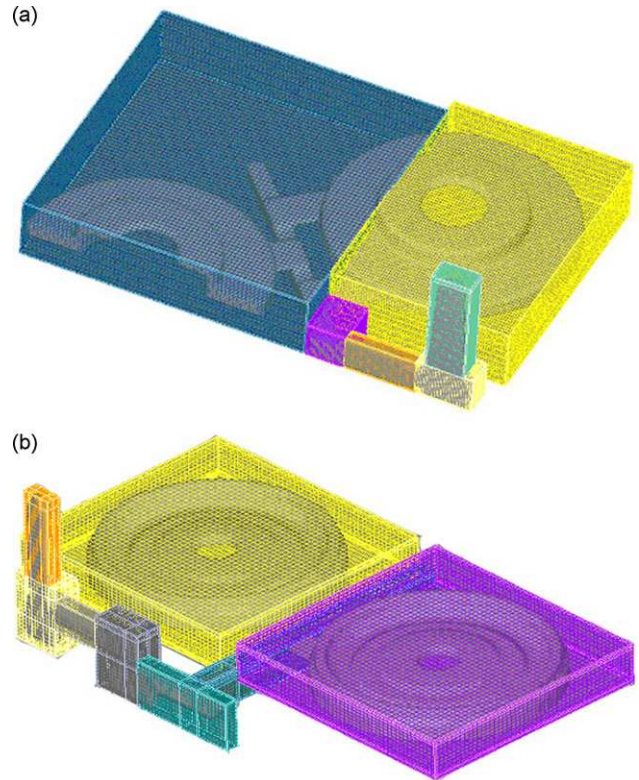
The multi-block meshes of the castings: (a) brake disc and (b) flywheel. Note that the mould mesh is not shown.
